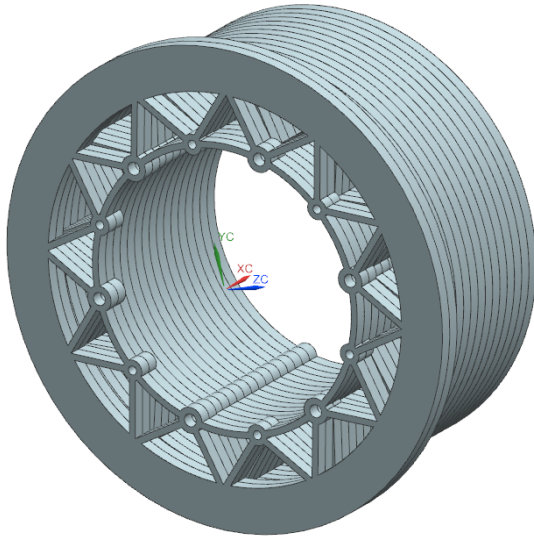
A stack of laser-cut steel plates to be bolted together, prior to machining the wheel shell profile.
